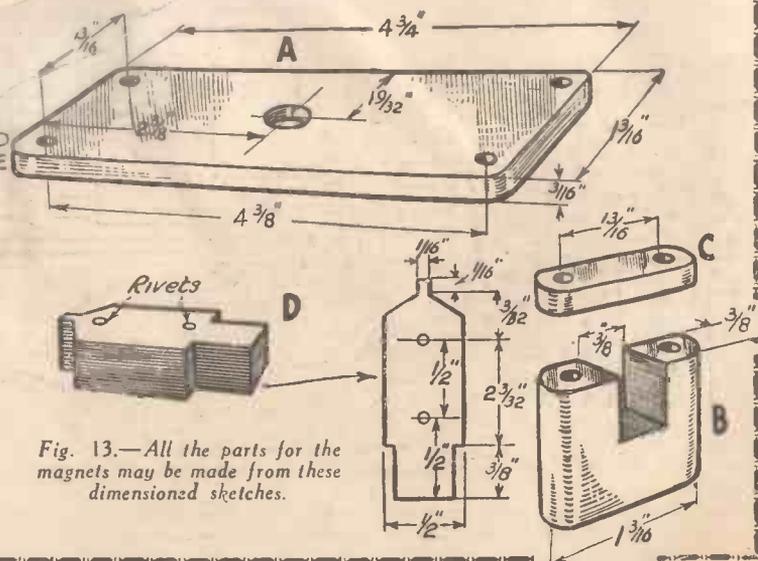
All the parts for the magnets may be made from these dimensioned sketches.
